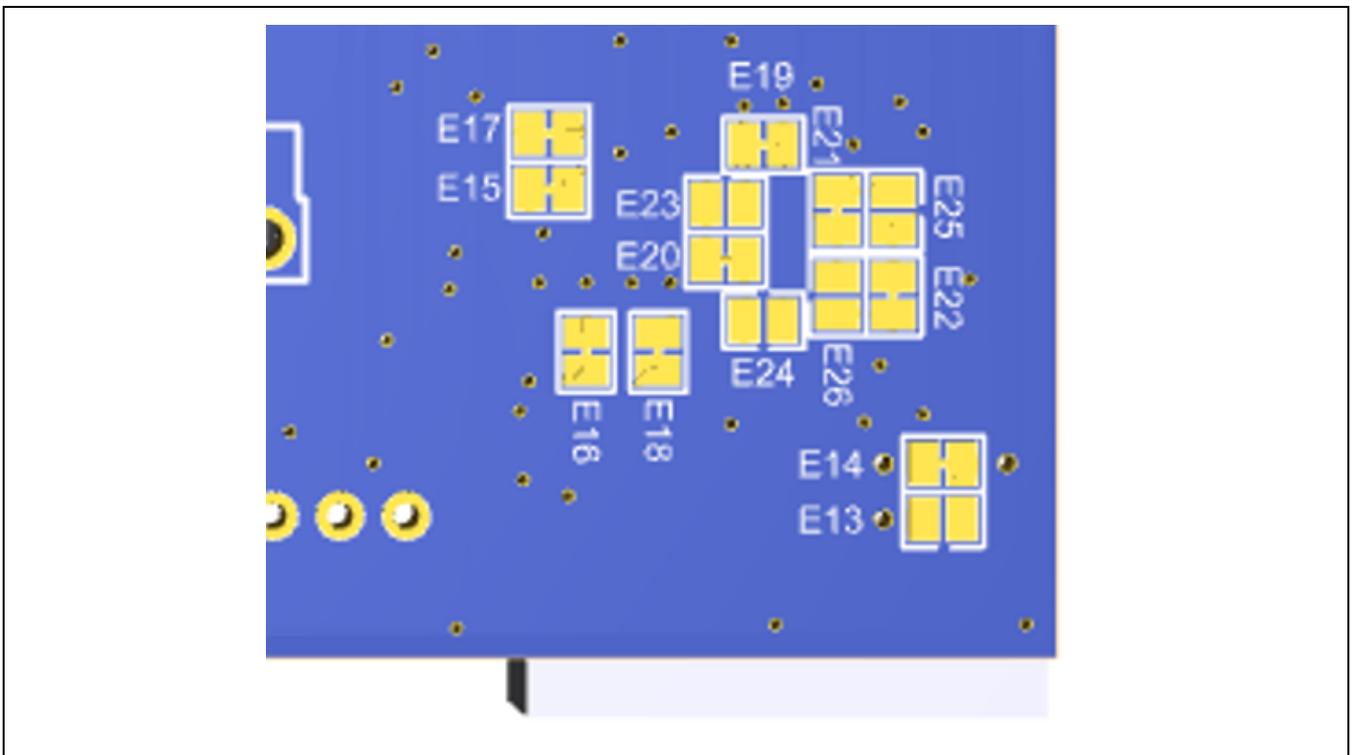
Assignments of Jumper Trace Cuts and Jumper Solder Bridges for Pmod 2 (Soldered Side)
